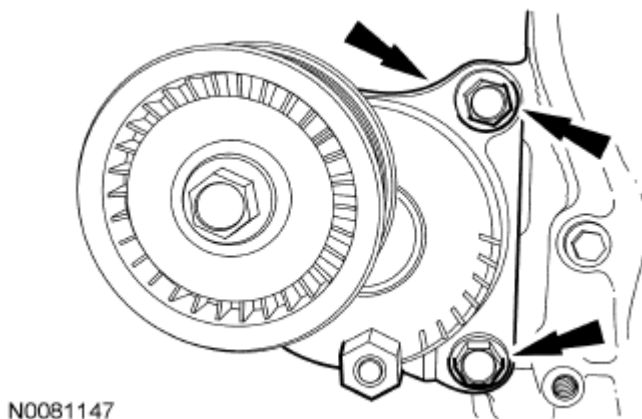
Locating Bolts And Accessory Drive Belt Tensioner
